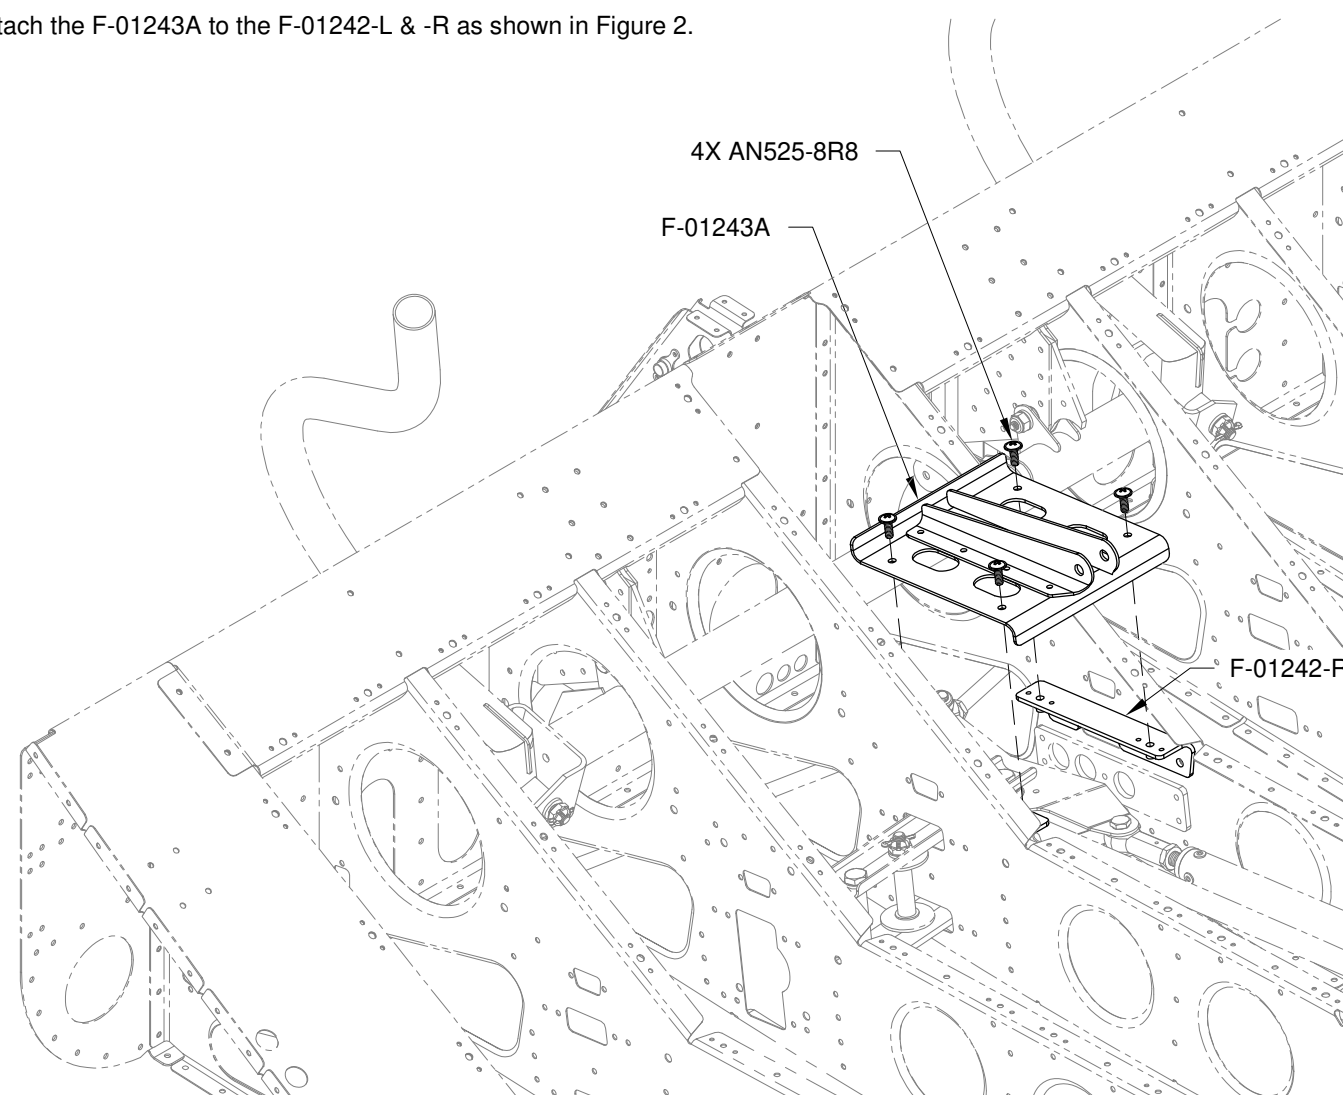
ATTACHING THE FLAP MOTOR CHANNEL BRACKET
